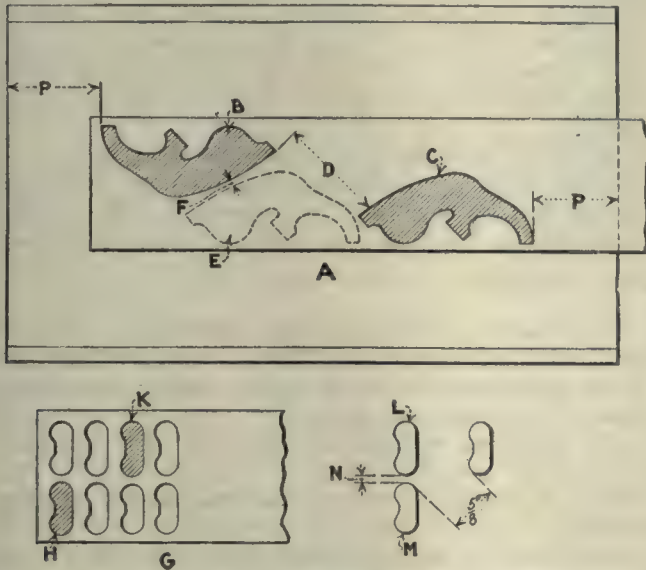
DOUBLE BLANKING DIE LAYOUTS
